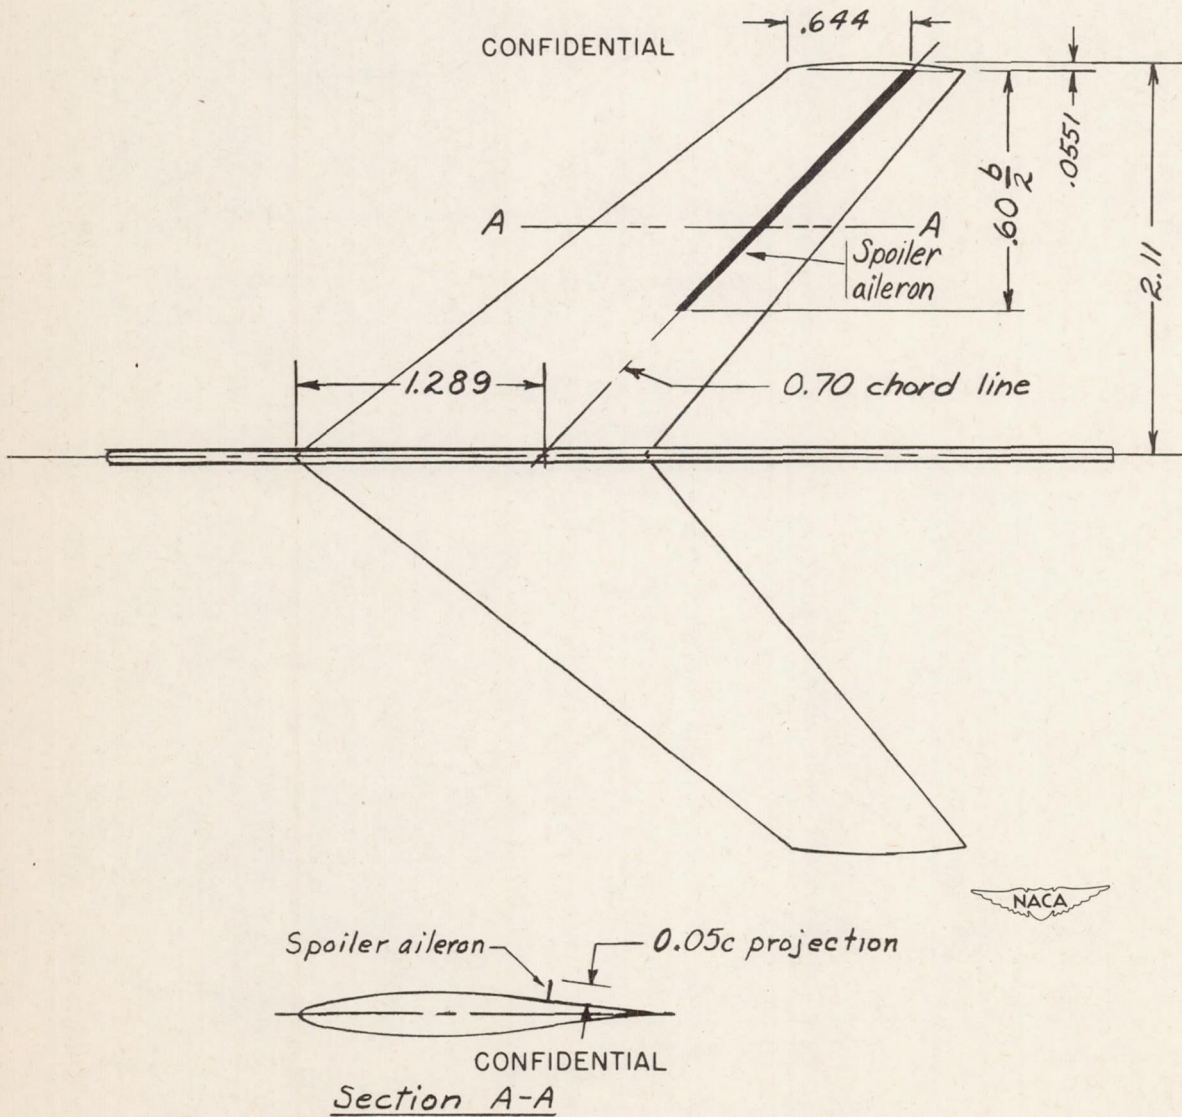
Sketch of the 51.3° sweptback wing showing a typical plain-spoiler-aileron configuration tested. (All dimensions are in feet, except as noted.)
